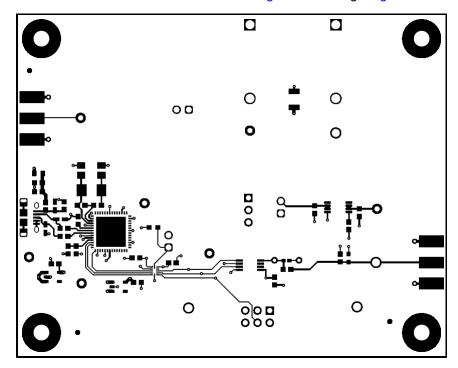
DAC121S101SEPEVM PCB Top Layer Layout
